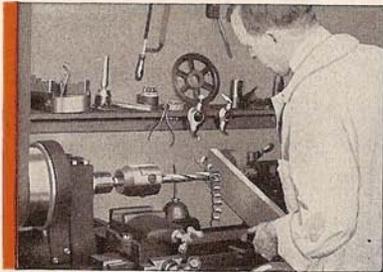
Lathe Used as Drill Press for Drilling Hole in Flat Piece of Work.
